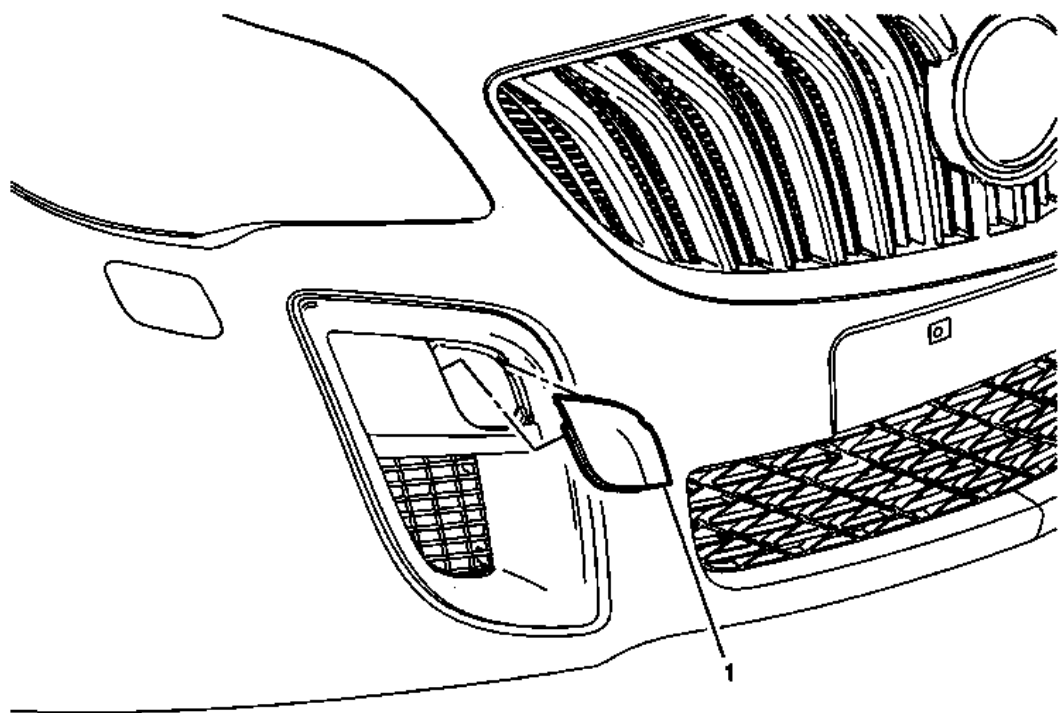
Front Bumper Fascia Tow Eye Access Hole Cover
